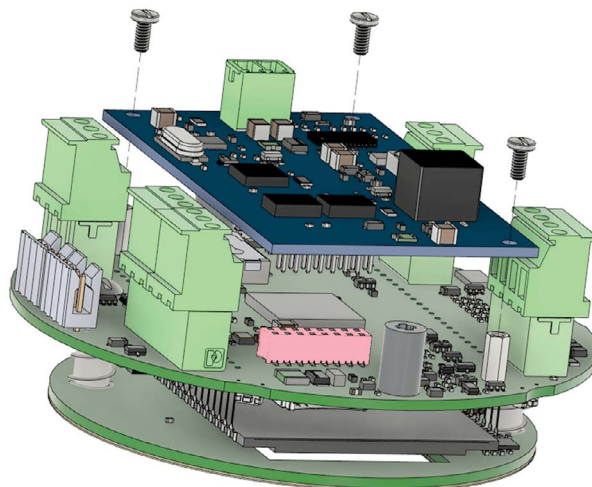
Header-to-pin alignment (header color is changed for illustration purpose; the actual header is black)
